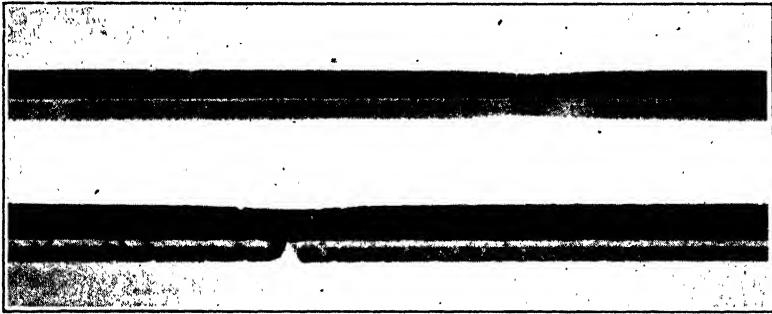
Comparative tensile tests of sheared strips, one as sheared, the other with fractured portion of edge removed by machining.
